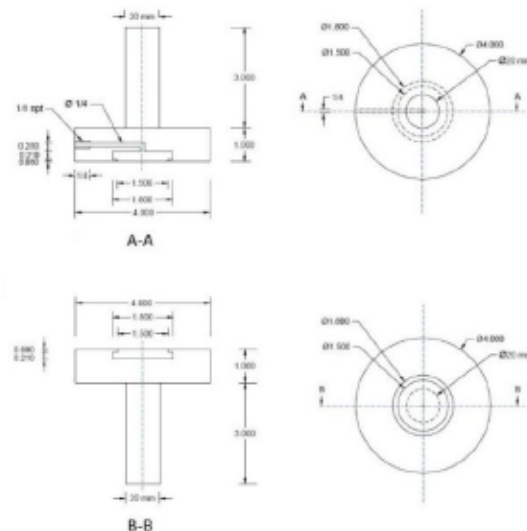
Two gaskets compression fixture for pressurized test (Bulk modulus and leakage) (Left) Lateral view (Right) Front view. Section A-A shows the air inlet port.
